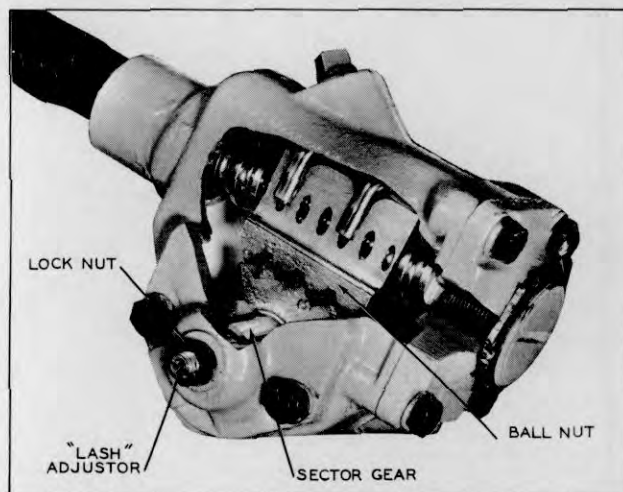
Steering Gear Lash Adjustment (Sector Gear)
